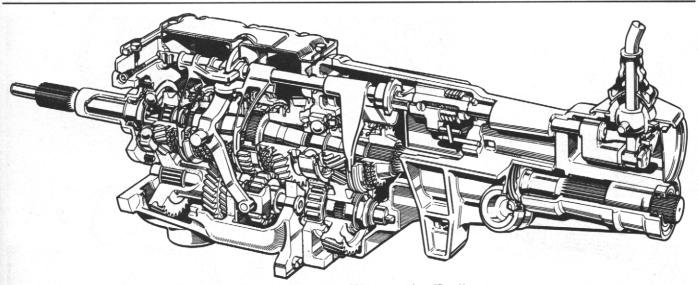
Cutaway view of N type gearbox (Sec 9)
